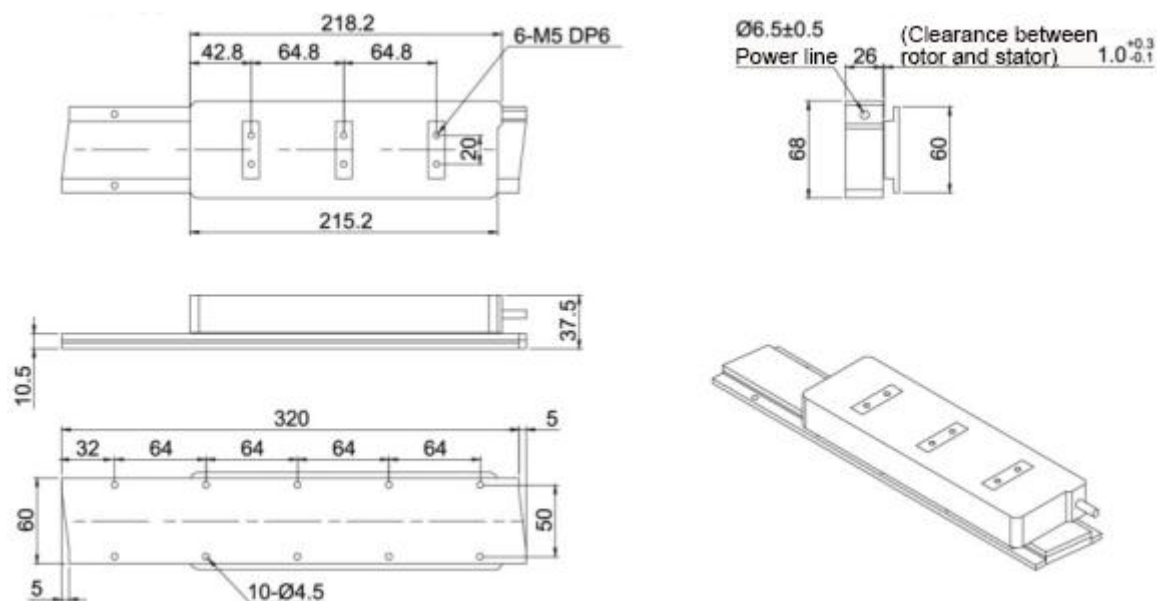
Dimensional drawing of WZCR-AZ60C3-□ motor
